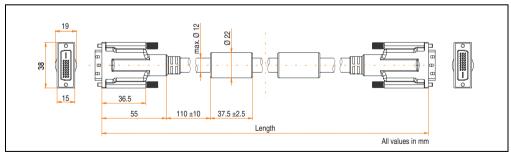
Dimensions - SDL cable 5CASDL.0xxx-03
